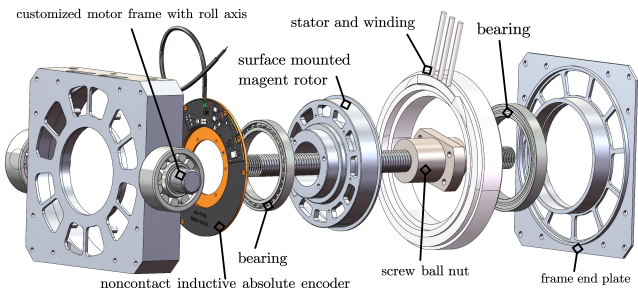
Exploded view of the F130-16-KV20 motor model with the ball screw.
